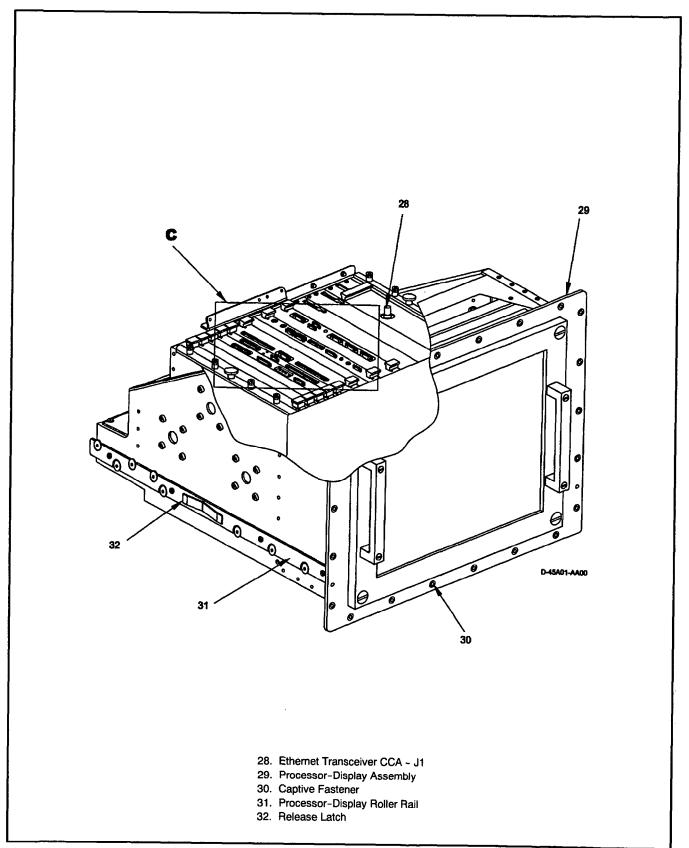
Control-Indicator Assembly C-12514/ASQ-225 and Control Indicator Set AN/ASQ-225 Components (Sheet 6)
